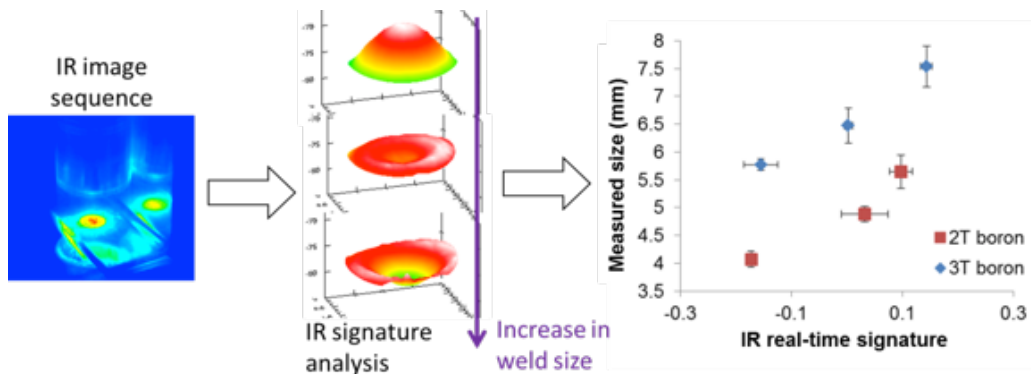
Real-time IR inspection providing reliable weld nugget size detection. 2T: two 1 mm thick hot dip coated boron steels; 3T: a 2 mm thick boron steel without coating sandwiched between two 1 mm thick hot dip coated boron steels.
